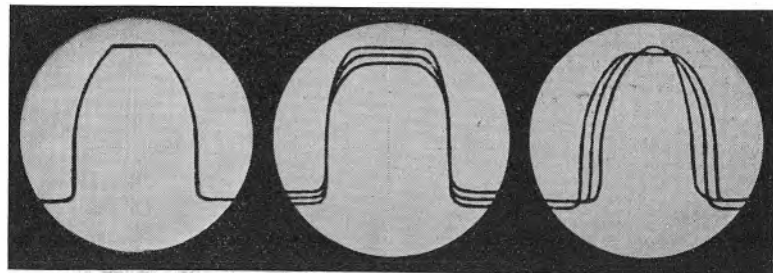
Typical patterns obtained with perfect and defective gears
